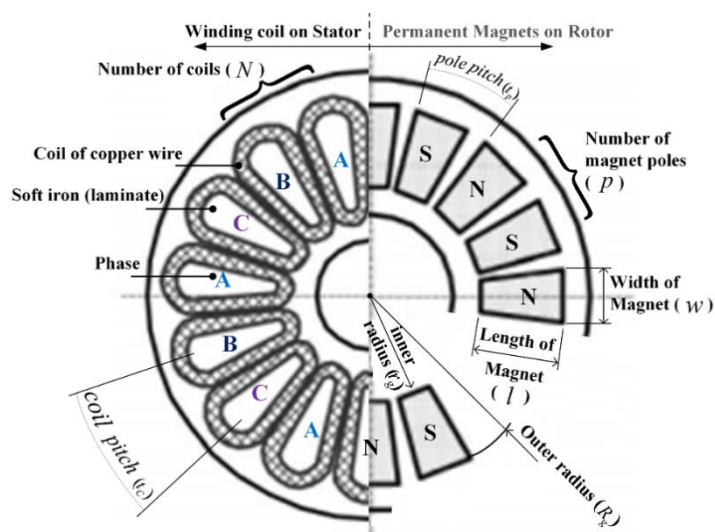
2D sectional view of the stator's copper coils (left) and rotor's magnets (right).
